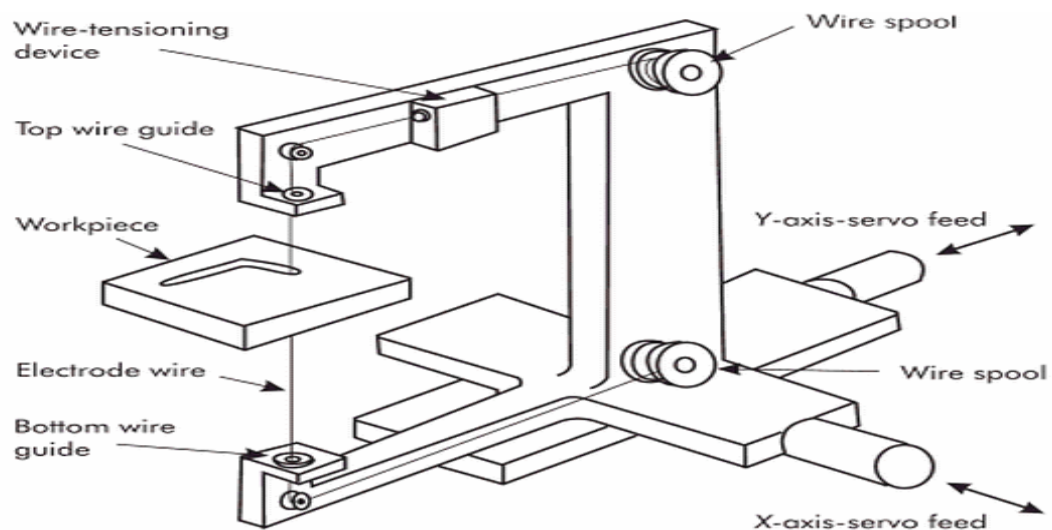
Diagram of wire erosion type of electric discharge machining [53].
